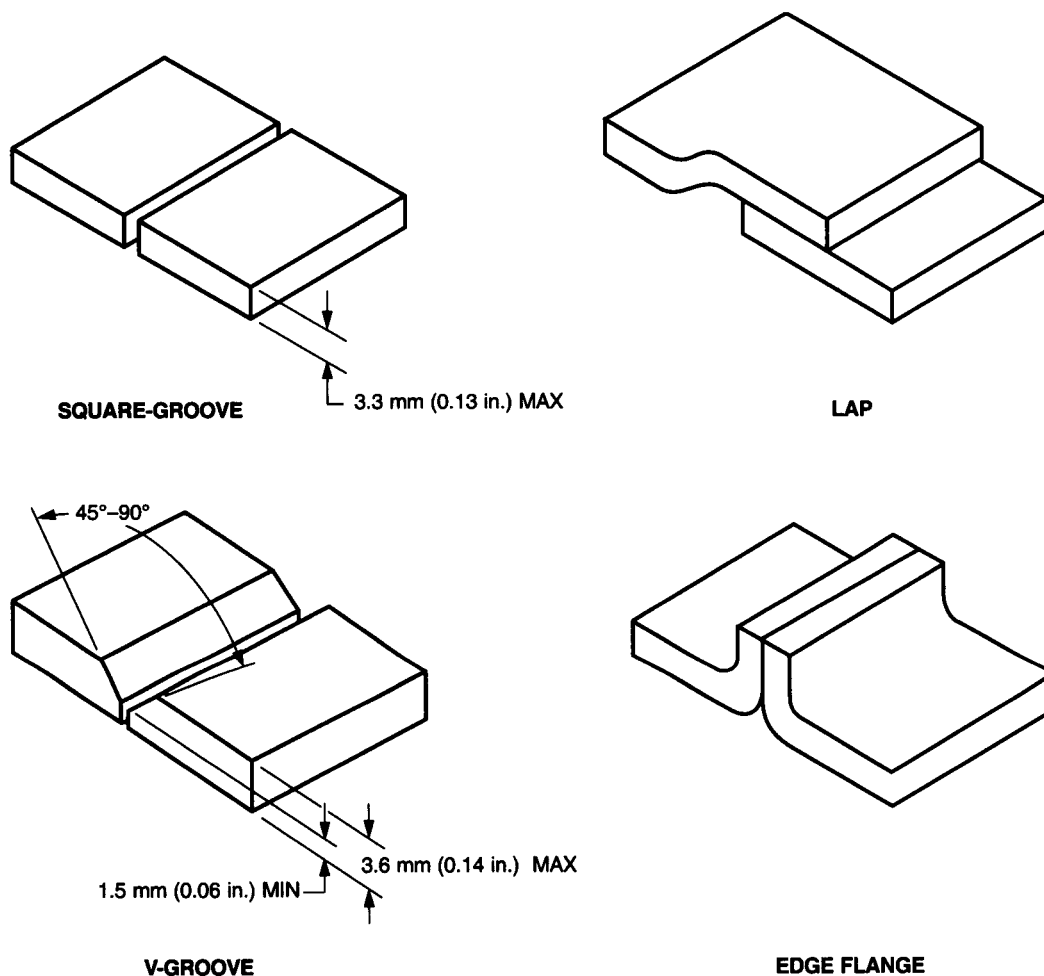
Joint Designs for Welding Lead Sheet
